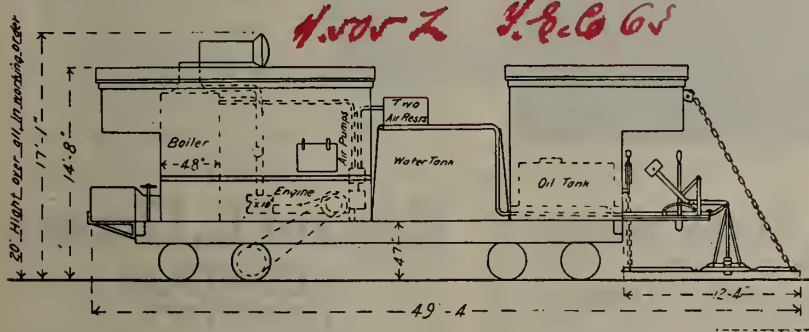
ARRANGEMENT OF MACHINERY IN WEED-BURNING CAR.
